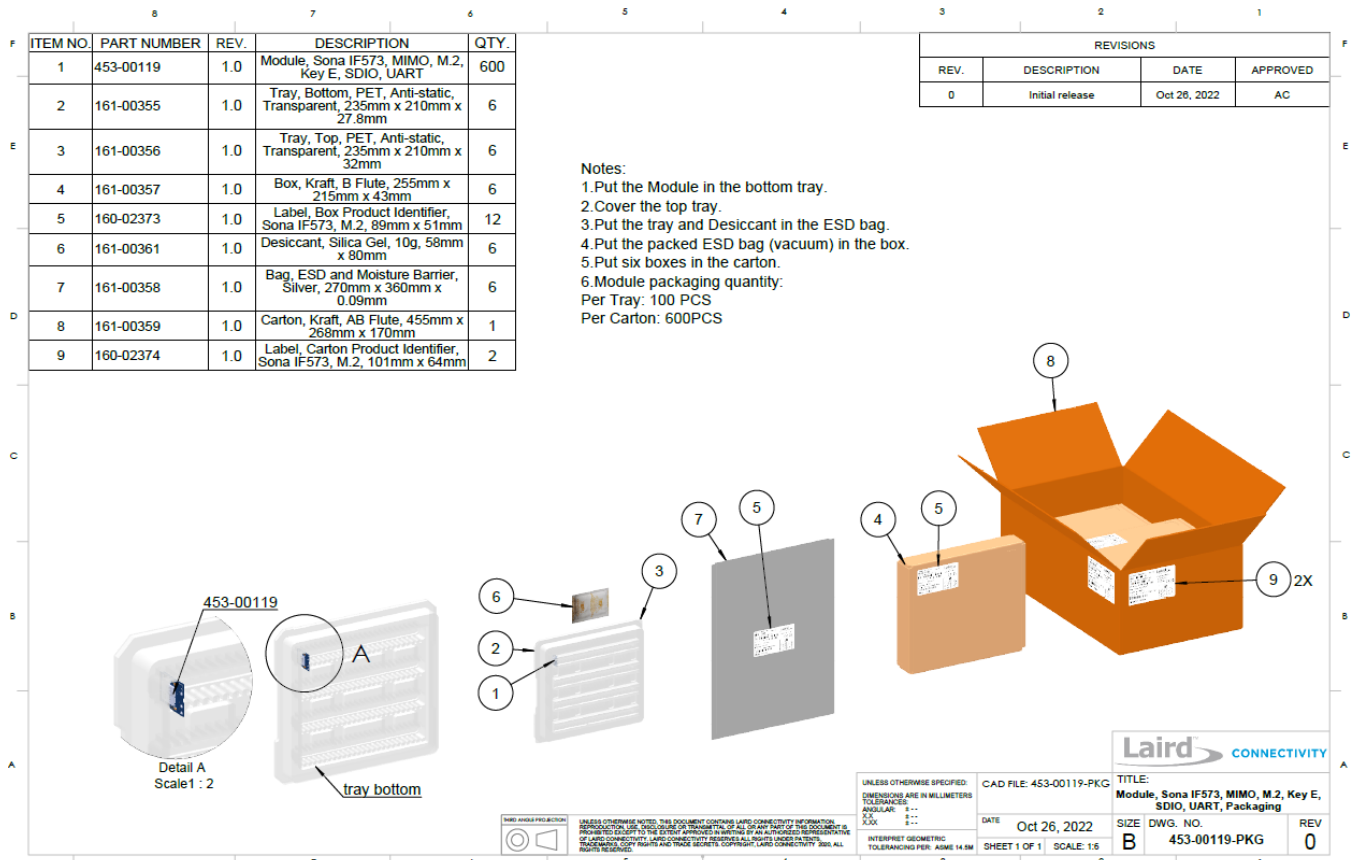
Sona IF573 M.2 2230 Packaging Process, 453-00119-PKG
